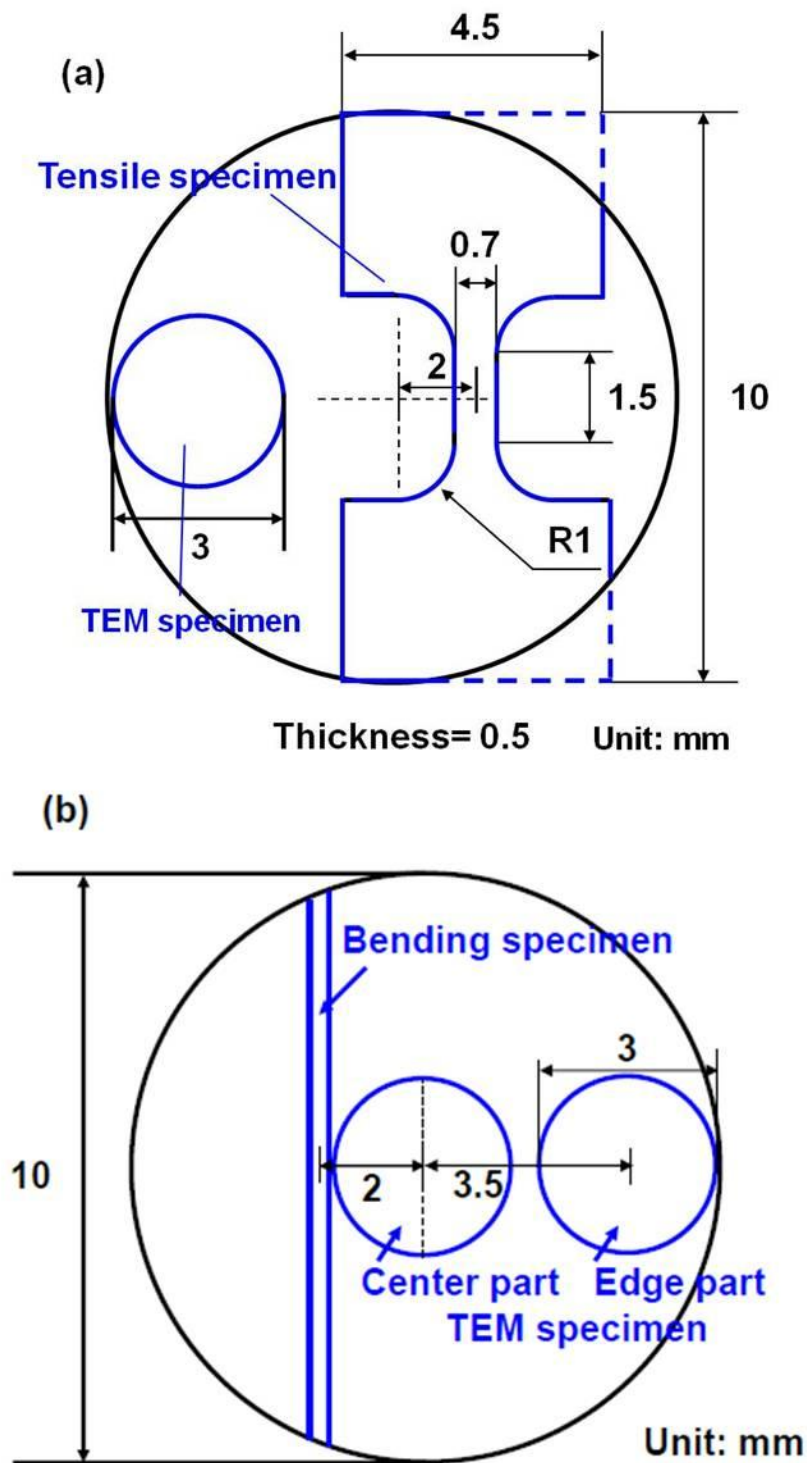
Dimensions of disk sample including positions for TEM disks and (a) tensile specimen and (b) bending specimen.
